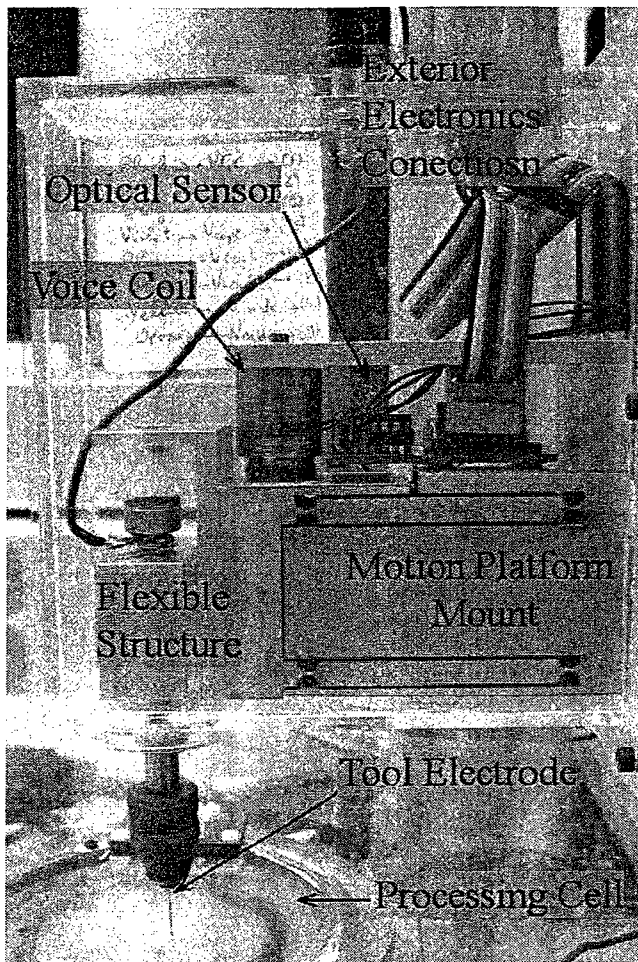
The machine head during machining. The entire structure is mounted to the z-motion platform. The tool electrode is attached to a flexible structure that is free to move vertically. The voice coil and optical sensor are above the flexible structure. The coil can be used to apply a force to the flexible structure, while the optical sensor measures the flexible structures position.
